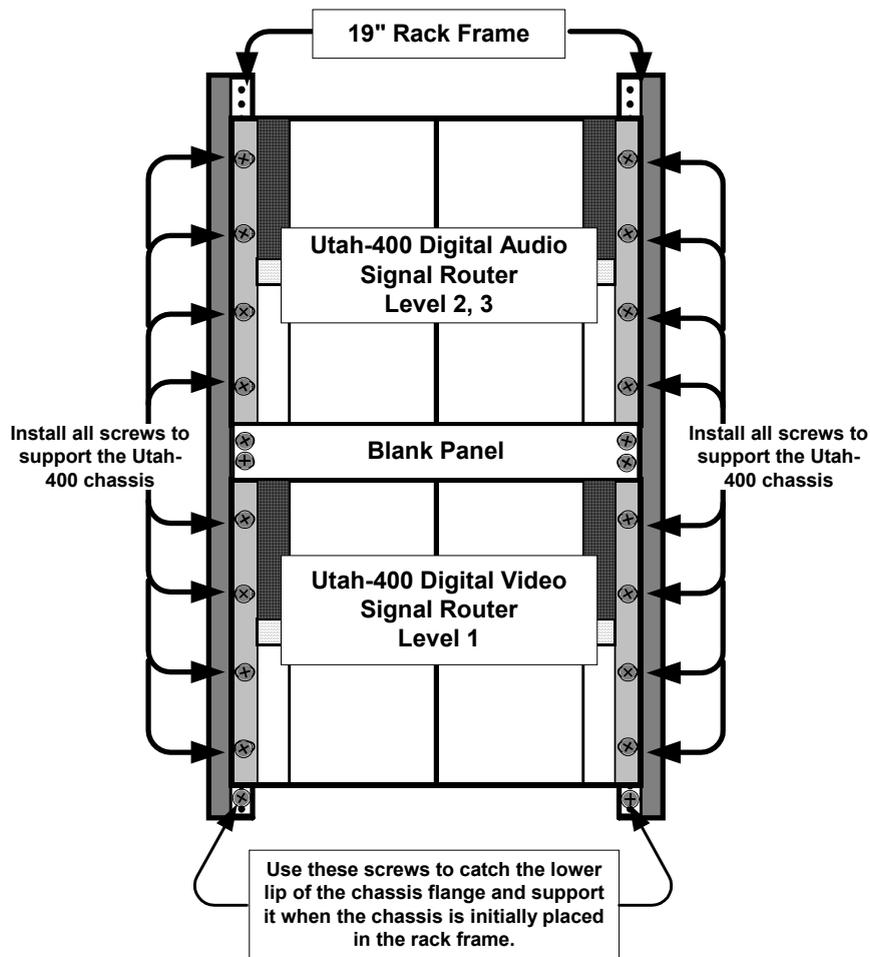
Utah-400 Chassis Mounted in 19" Rack Frame
